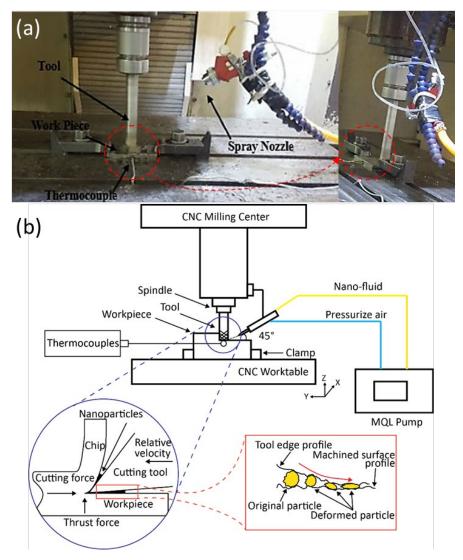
(a) Experimental setup for NF-MQL milling condition (b) Schematic illustration of the NF-MQL
